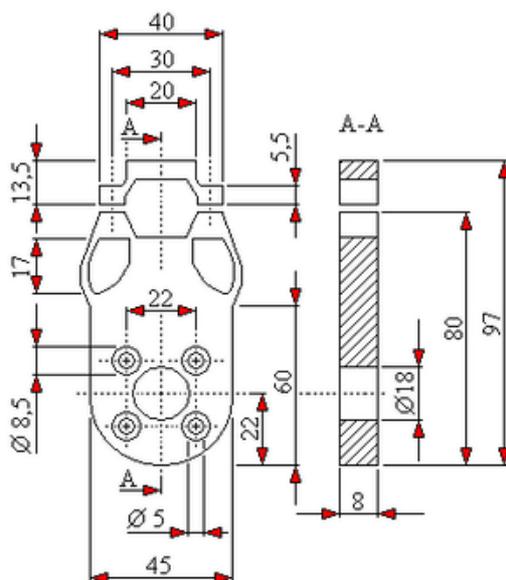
Motor mounting bracket for truck arm. Material: PLA
